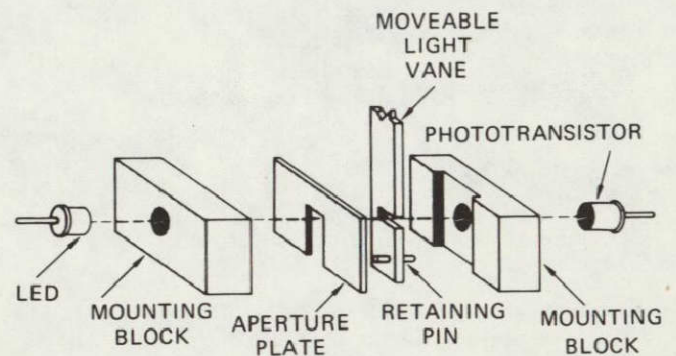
EXPLODED DRAWING OF SHUTTER
